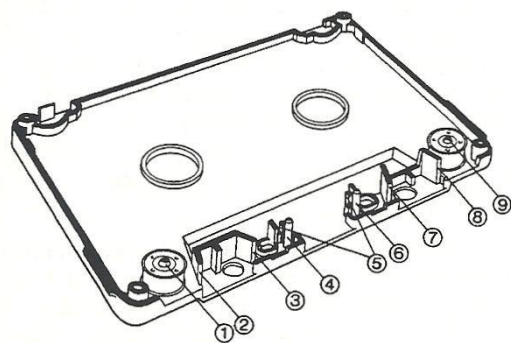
① left-hand roller guide and axle; ②, ③ left-hand stays, ④ left-hand main pin guide, ⑤ support points for the pressure-spring pad, ⑥ right-hand main pin guide, ⑦, ⑧ right-hand stays, ⑨ right-hand roller guide and axle
